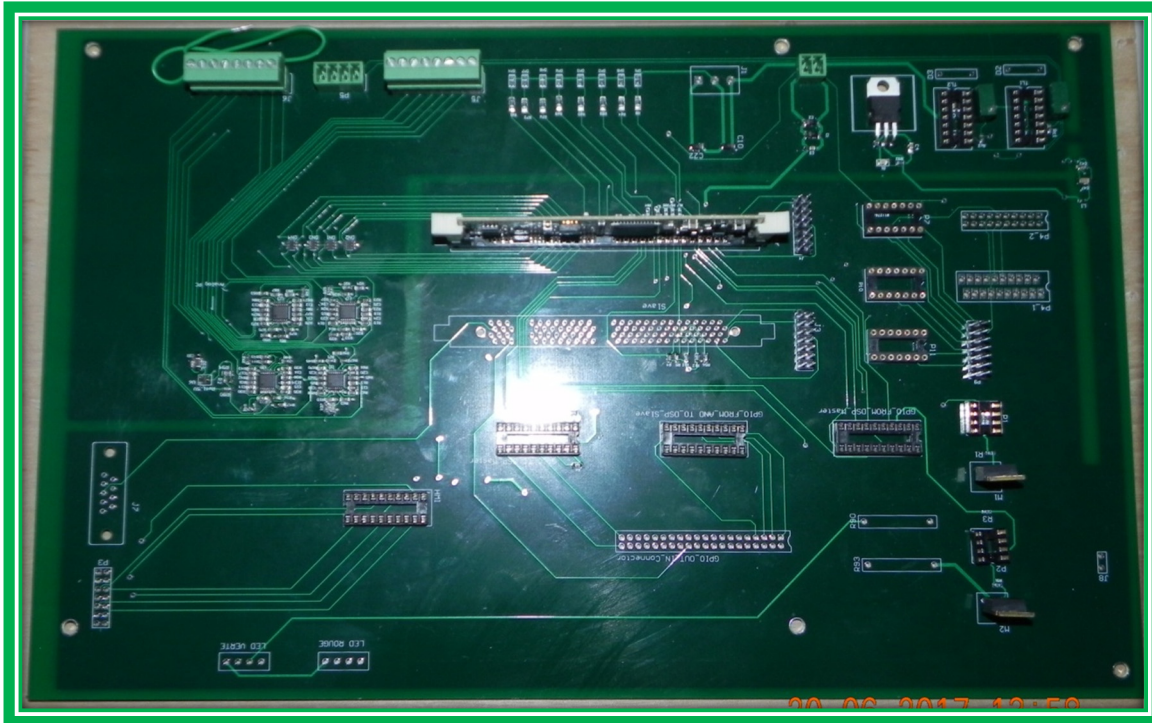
b) PCB interface card (version3) of eZdsp F28335
